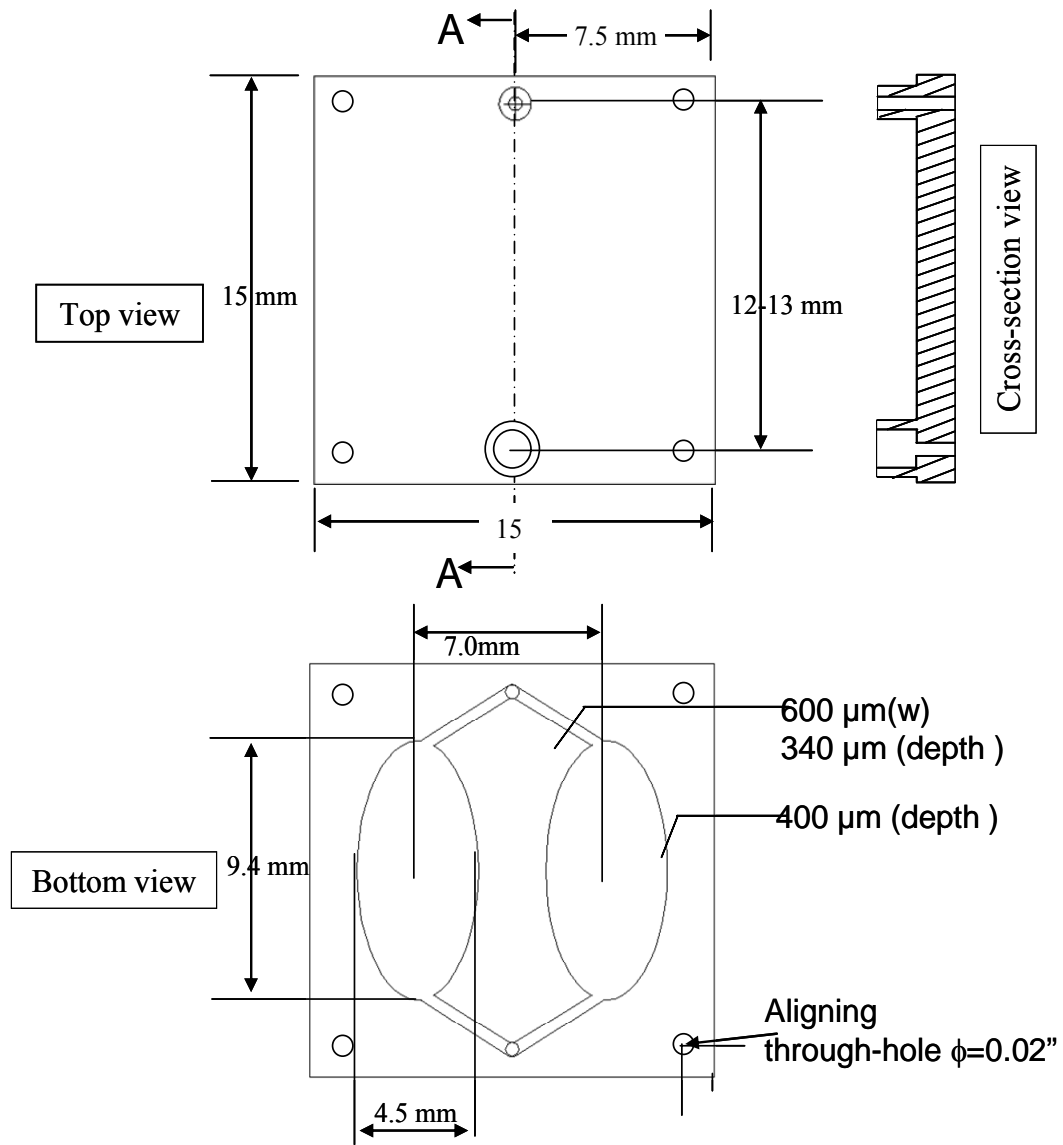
Top, bottom and cross-sectional view with dimensions of a fluidic package.
